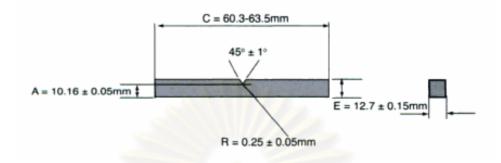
Dimension of impact test specimen ASTM D256 [23]
